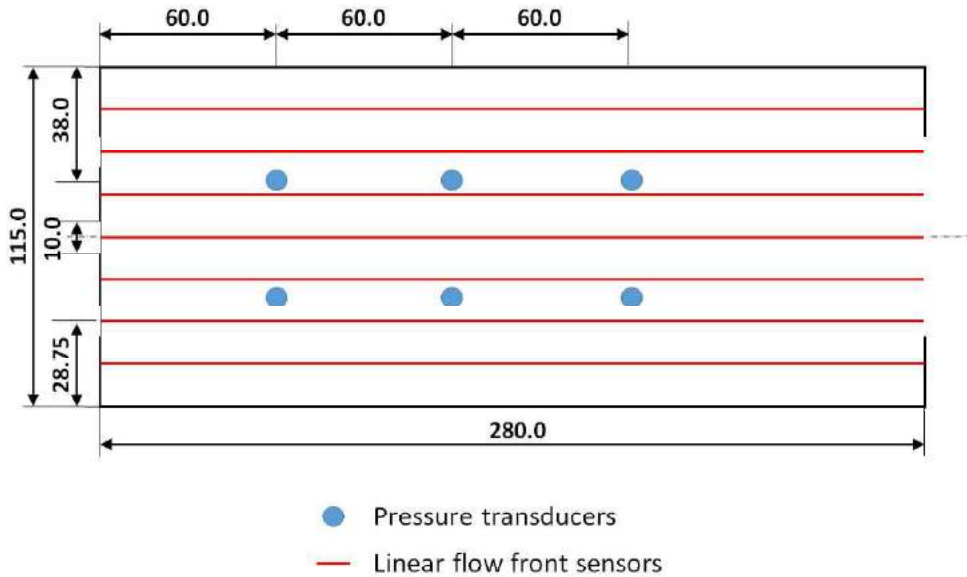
Geometry of the rectangular moulding tool and position of the sensors.
